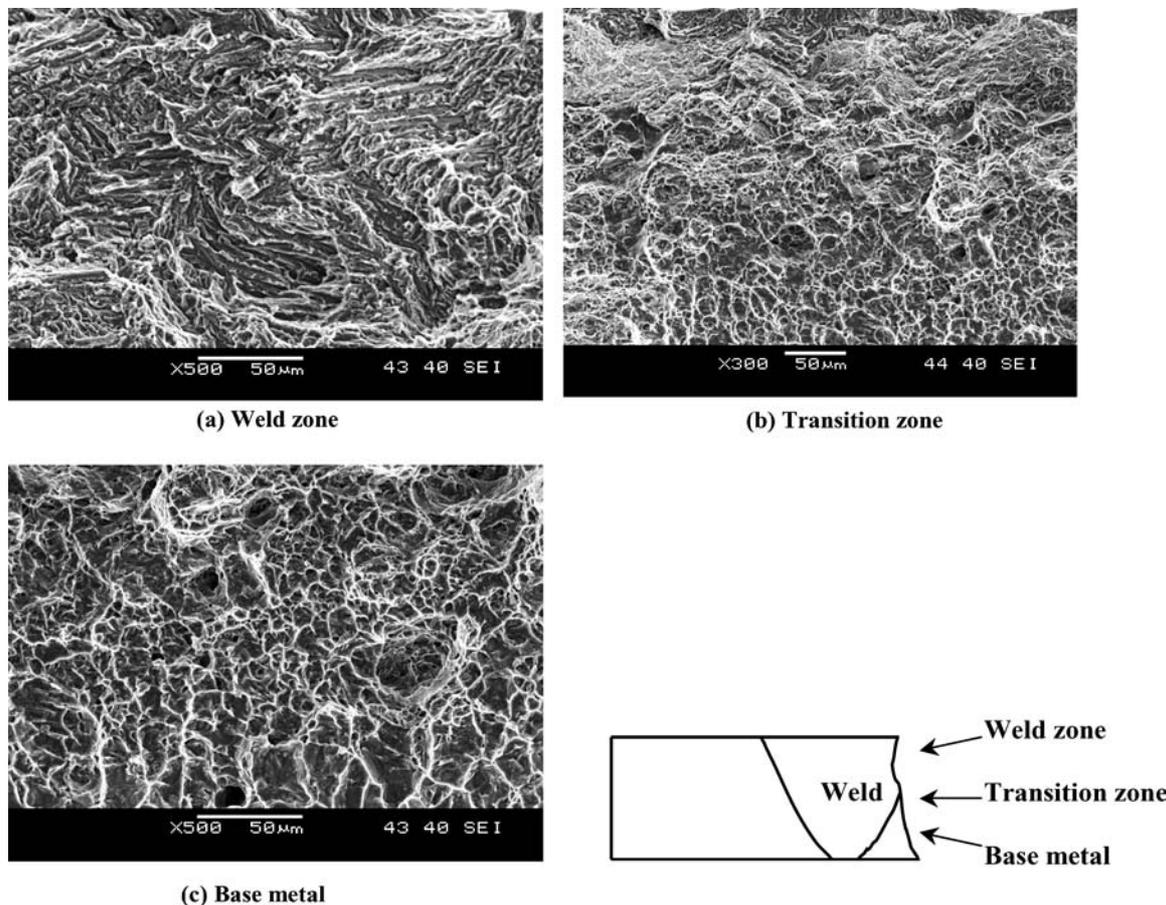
Fracture surfaces at various locations of a weld made with 10% oxygen content.
